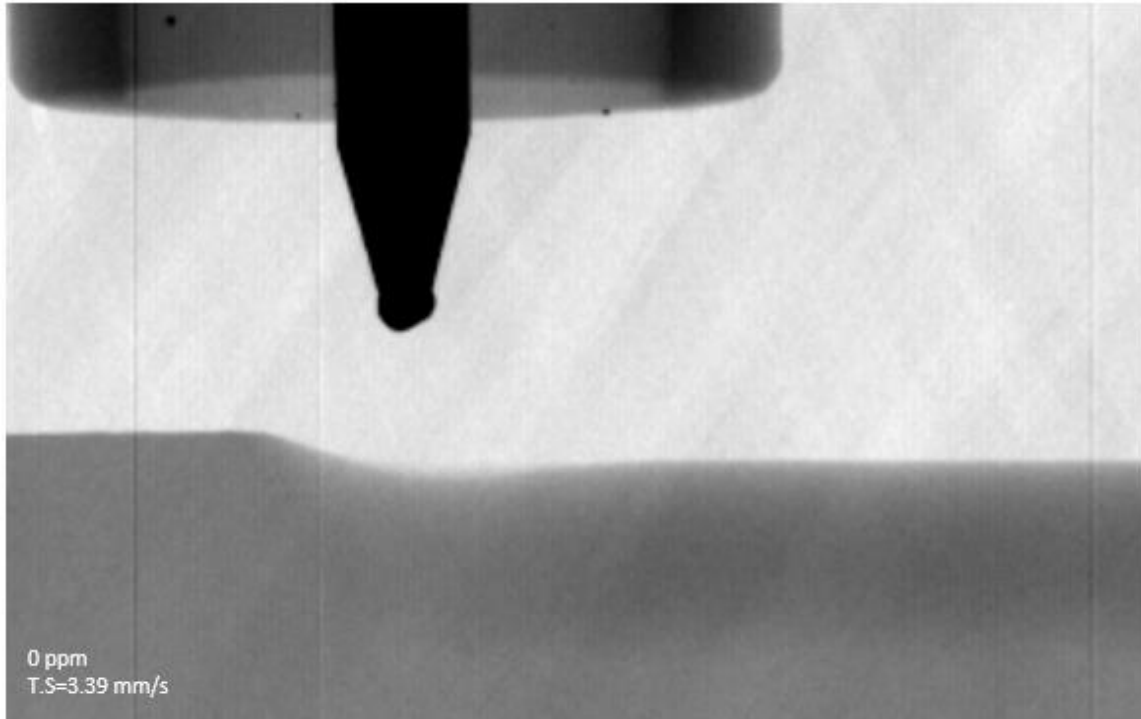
Alloy 6061 welded using 0 ppm of shielding gas hydrogen at 3.39 mm/s.
